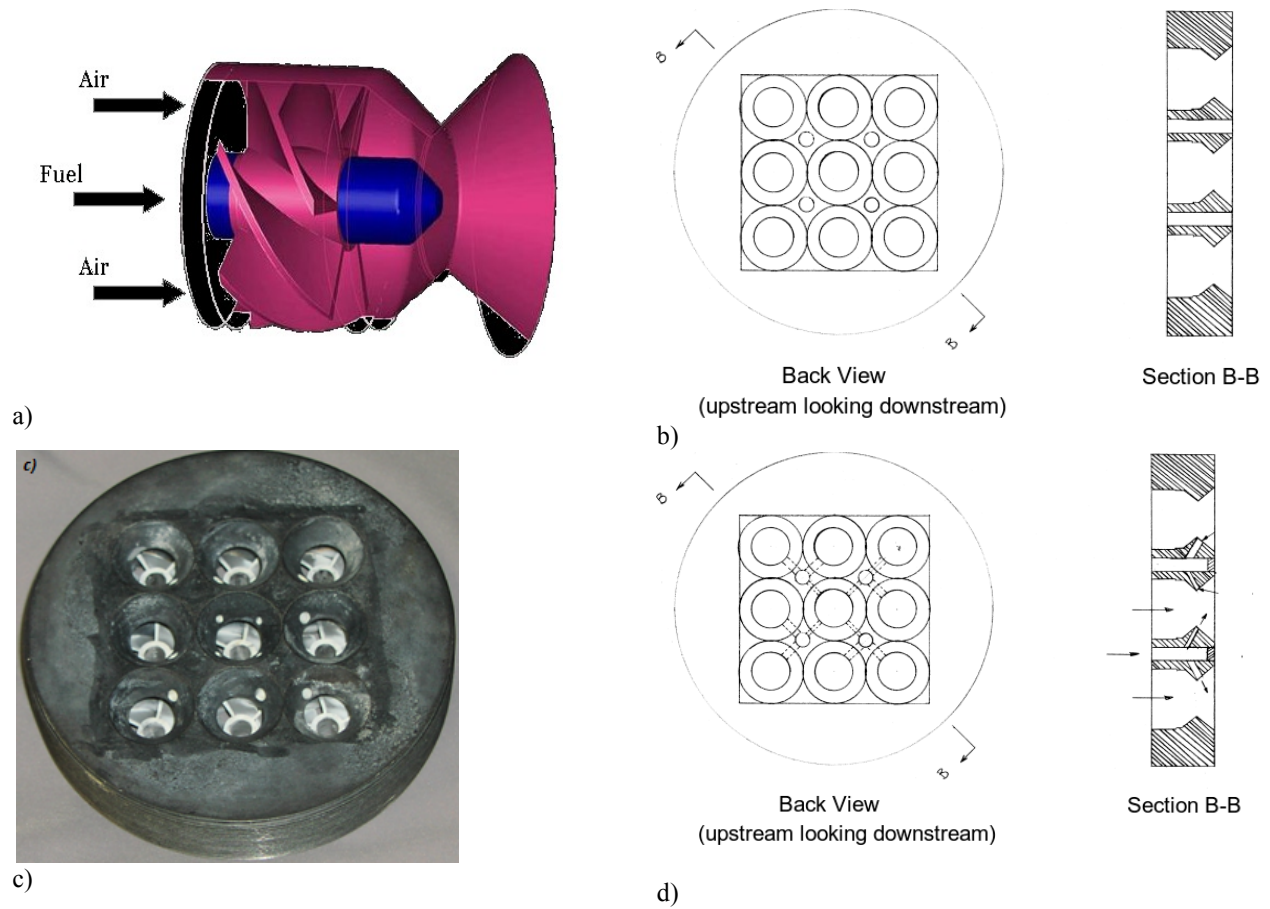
Experimental hardware: a) drawing of a fuel/air mixer, b) drawing of a 9-point injector with straight through spent cooling, c) and d) picture and drawing of a 9-point injector with spent cooling at the throat.
